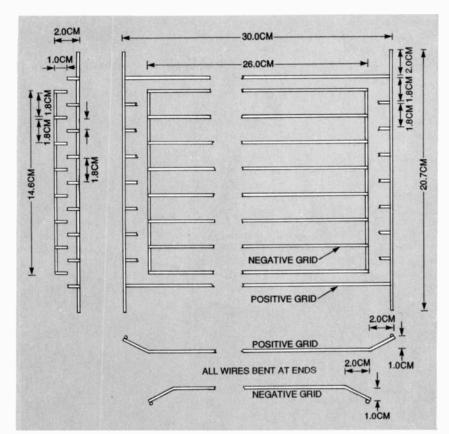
THE GRID for the solar-powered fly controller is fabricated from stiff wire that can be assembled with solder, braising material, or by welding. No. 12 solid copper wire without insulation is a good choice. It forms easily and solders well with a 100-watt iron. (Note: 2.54 cm equals 1.0 inch.)
